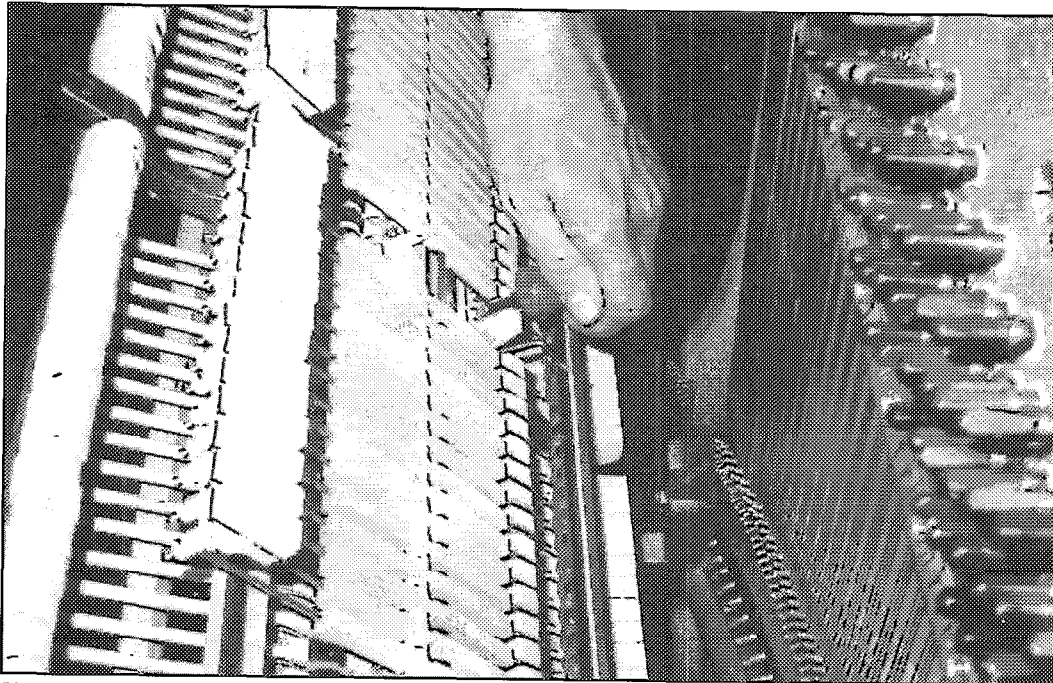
Tightening wippen flange screws with a stubby screwdriver.
